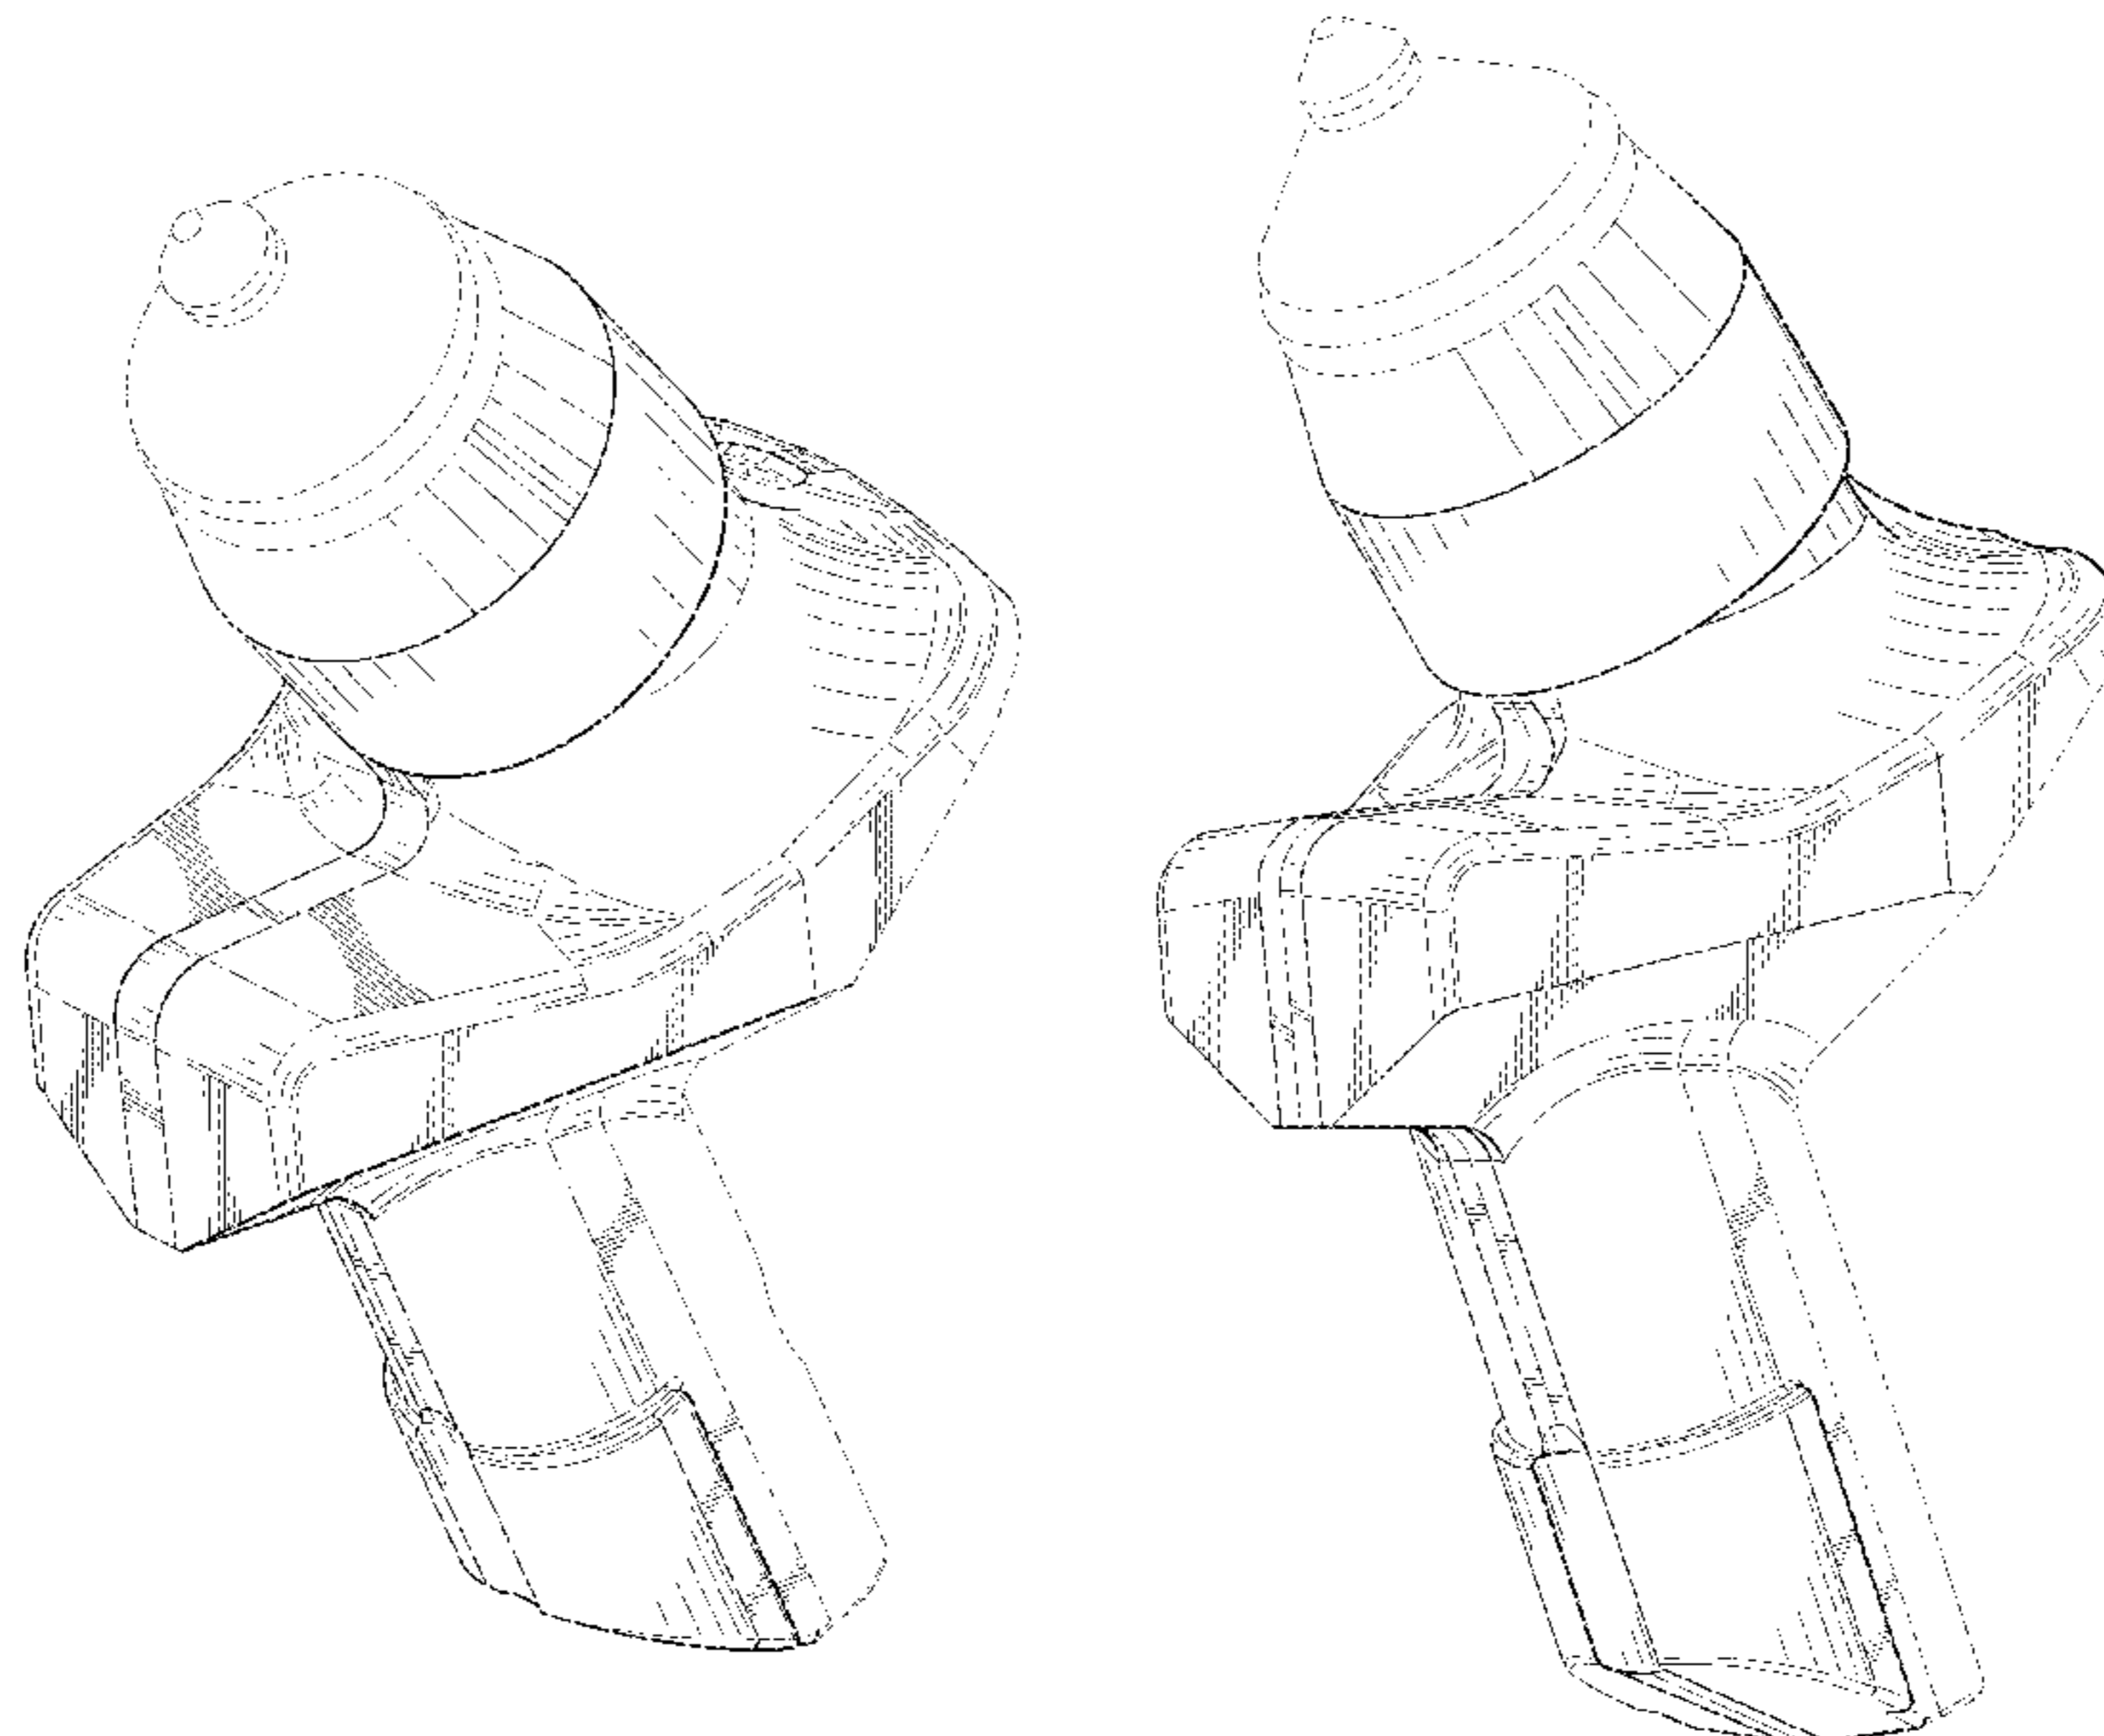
shows a front right isometric view of the tool of FIG. 1, a front left isometric view being a mirror image of the front right isometric view of FIG. 4.
